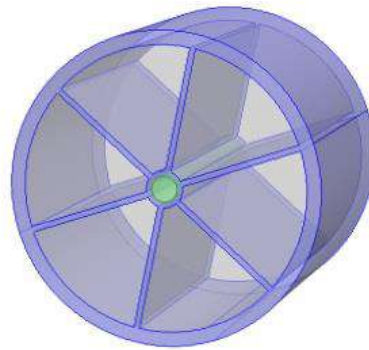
The schematic view of the proposed design III for using 3D printing technique.
